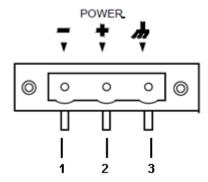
3-Pin 7.62mm-Spacing Plug-in Terminal Block (socket)
